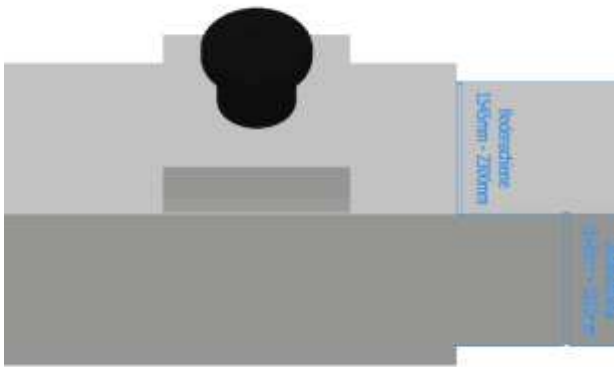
Set the middle tube of the jig on the side at "AeroFix G3 /3.1" to the locking point on the base rail 1545 mm - 2300 mm.
